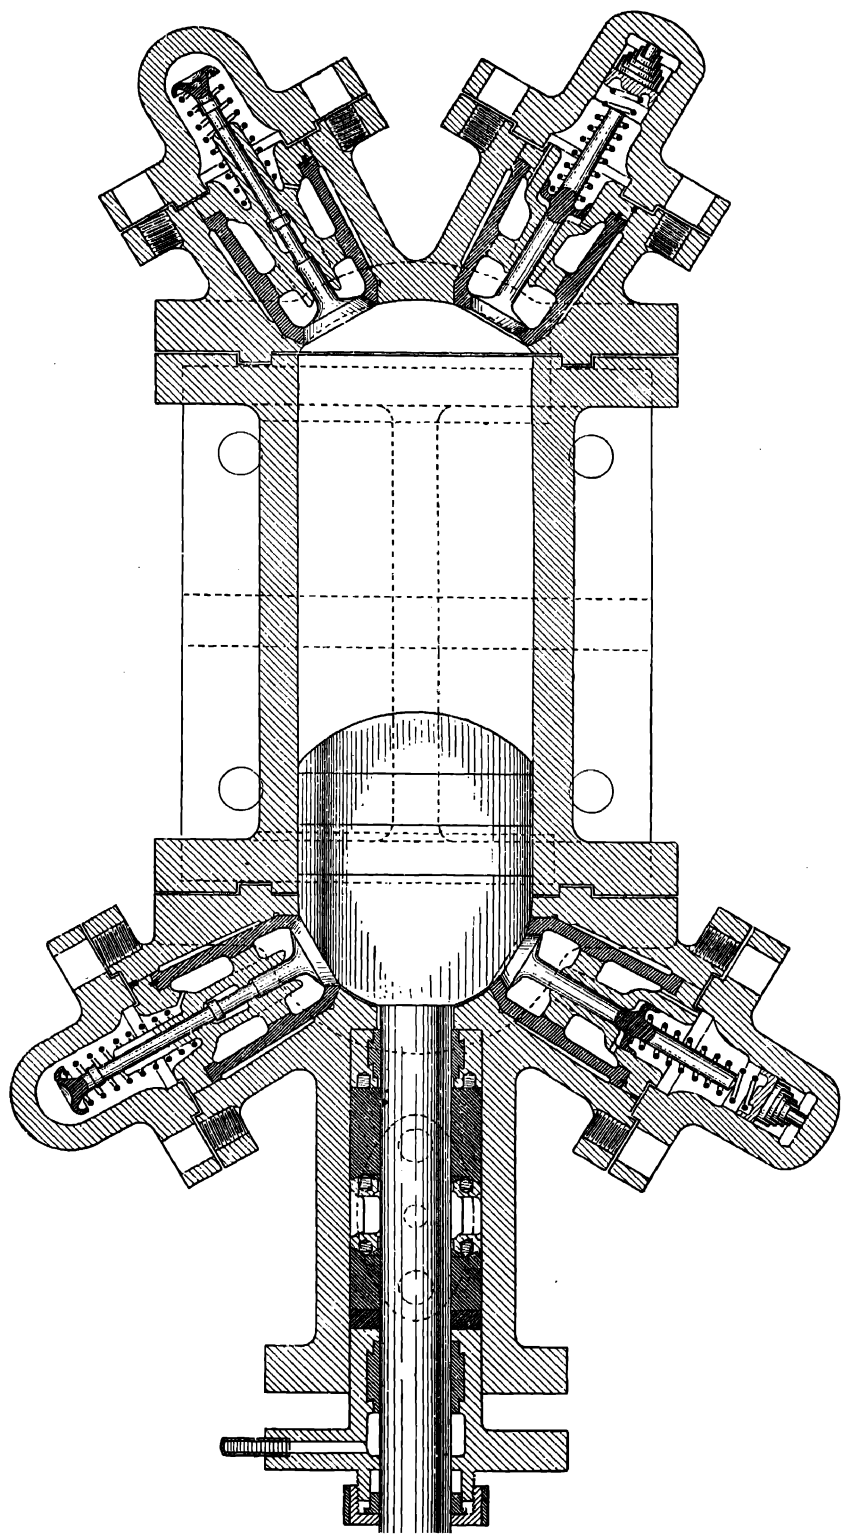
Compressing Cylinder of the Linde Ammonia Machine.
